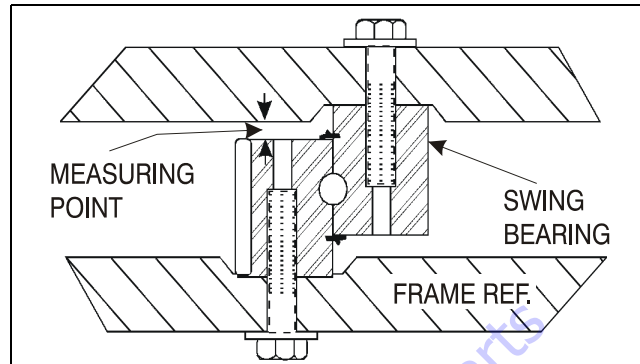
Swing Bearing Tolerance Measuring Point
